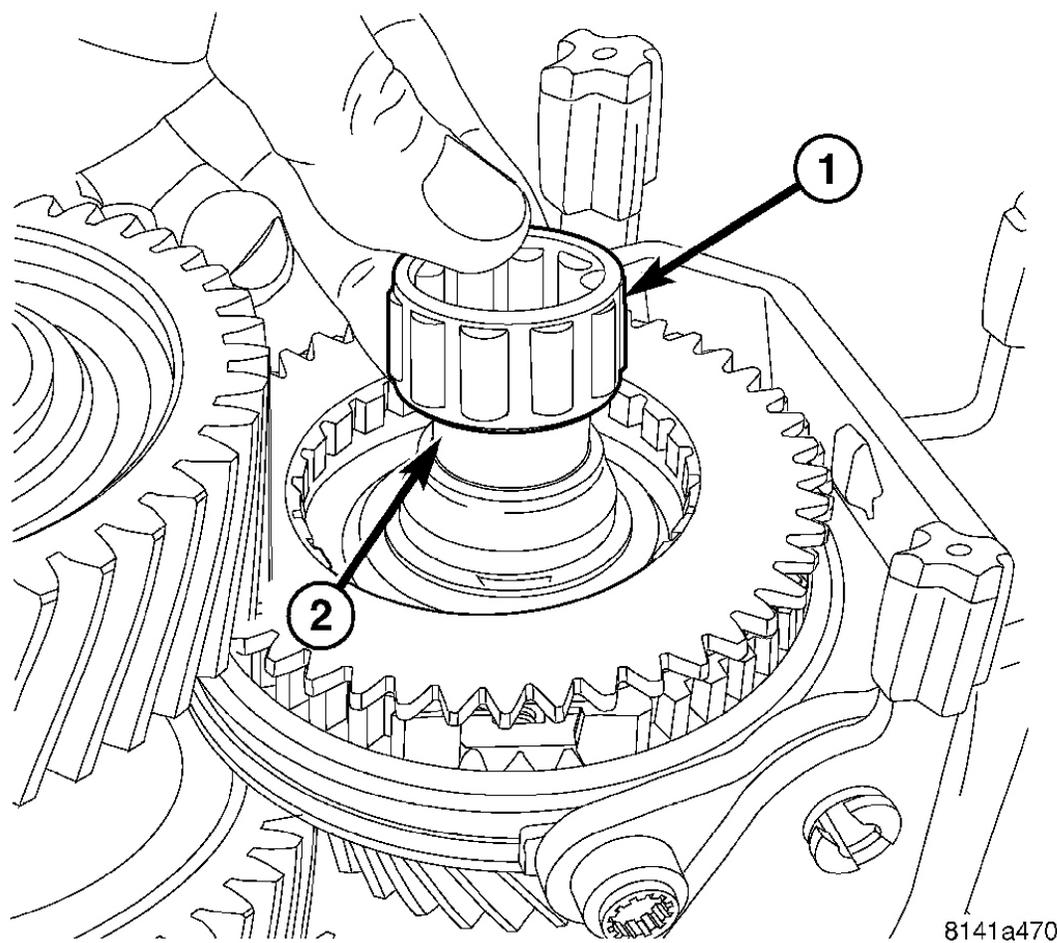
Installing Input Shaft Roller Bearing On Mainshaft
